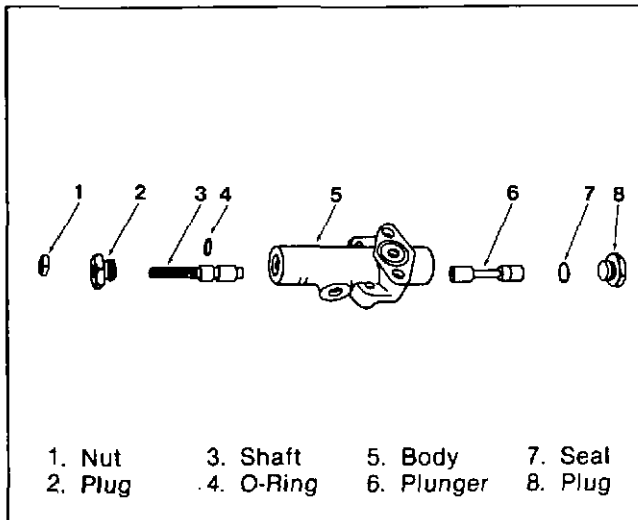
, (F5161). Load balance valve-disassembled view.
